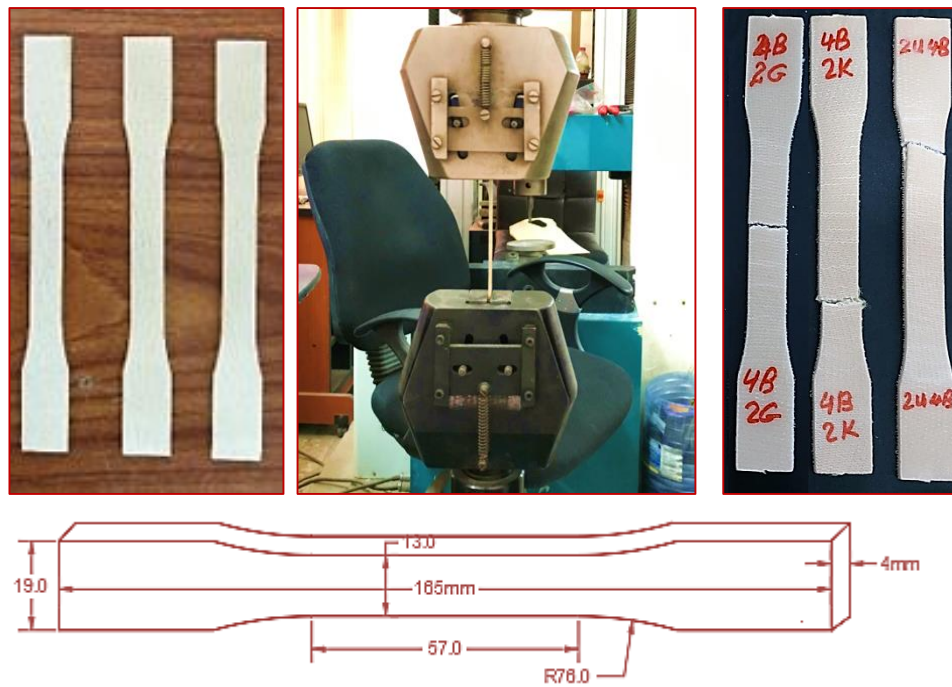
(a) The samples before tensile testing, (b) Testing apparatus, (c) The samples after tensile testing and (d) The standard sample dimensions.
